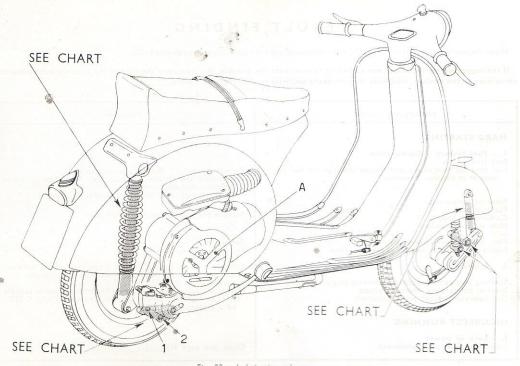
Lubrication scheme A: engine lubricated by the fuel mixture -1: filling hole -2: draining hole.
